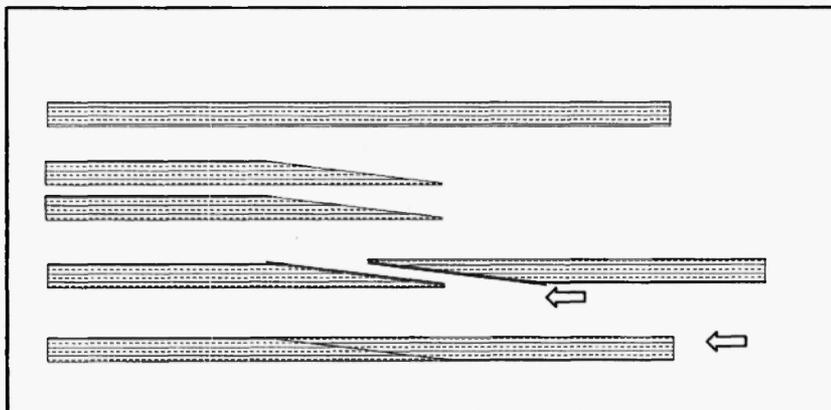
Fabricating Tapered Adhesive Joint Coupons
